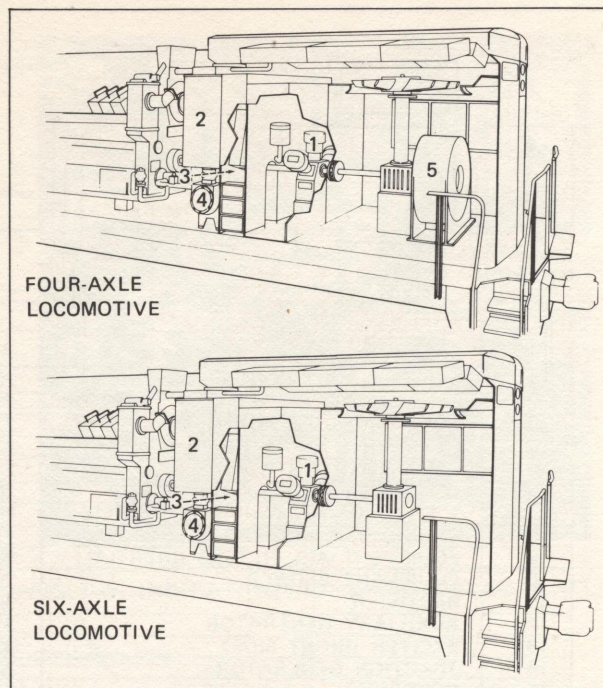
NO. 2 END EQUIPMENT ARRANGEMENT.
